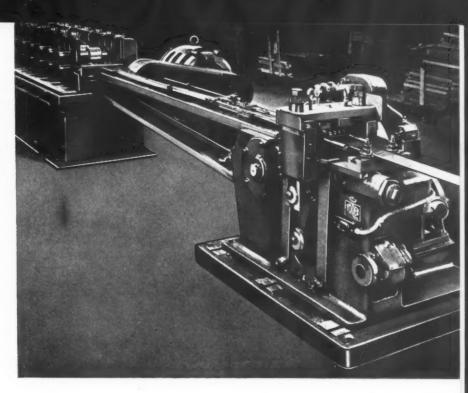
Notching Machine Used in Conjunction with a Cut-off Machine for Cutting Complex Channels or Box Shapes
